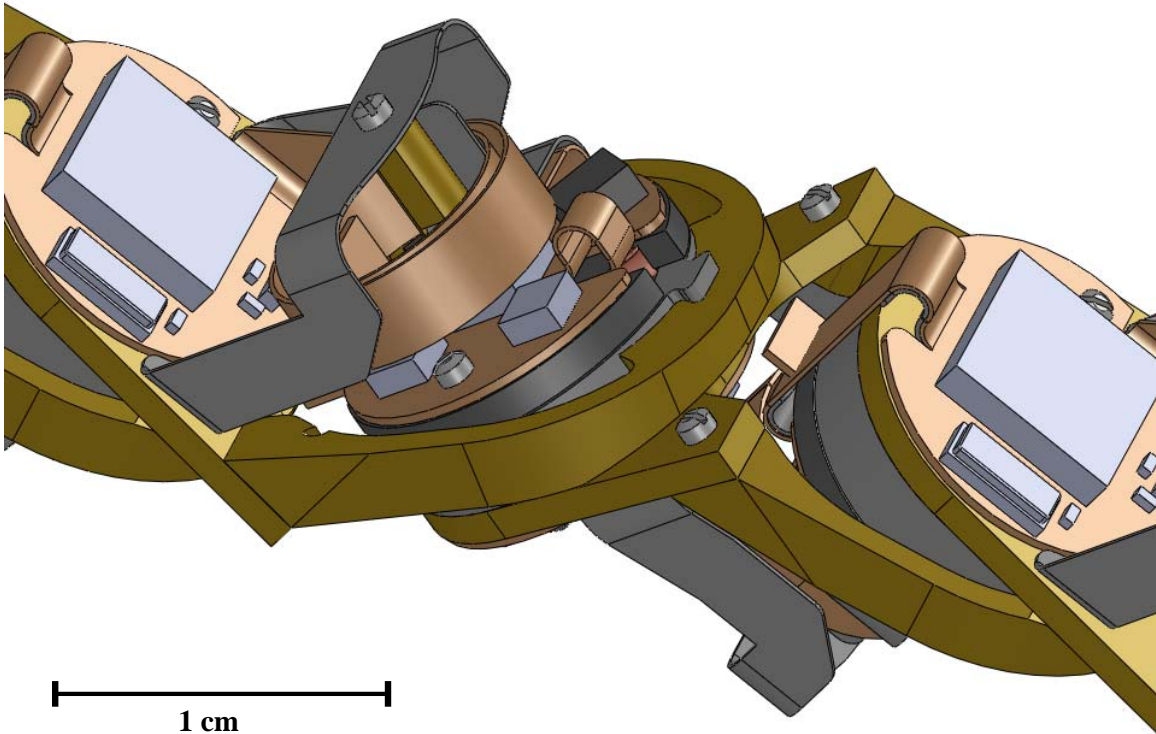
Millibot chain, assembled by building a Millibot module around each section of the continuous flex circuit. This view shows how the rotor joiner of each module attaches to the processor bushing of its neighbor. When the chain is assembled, the sensor magnet is positioned above the magnetoresistive rotation sensor of the next module. Power and data are transferred between modules over the coiled section of the continuous flex circuit.
